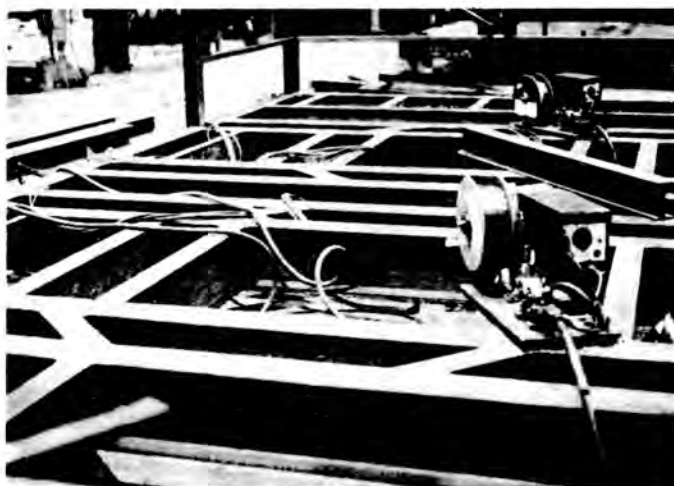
March 1983, Structural Steel Fabrication, 15" I-Beam Module Base.
